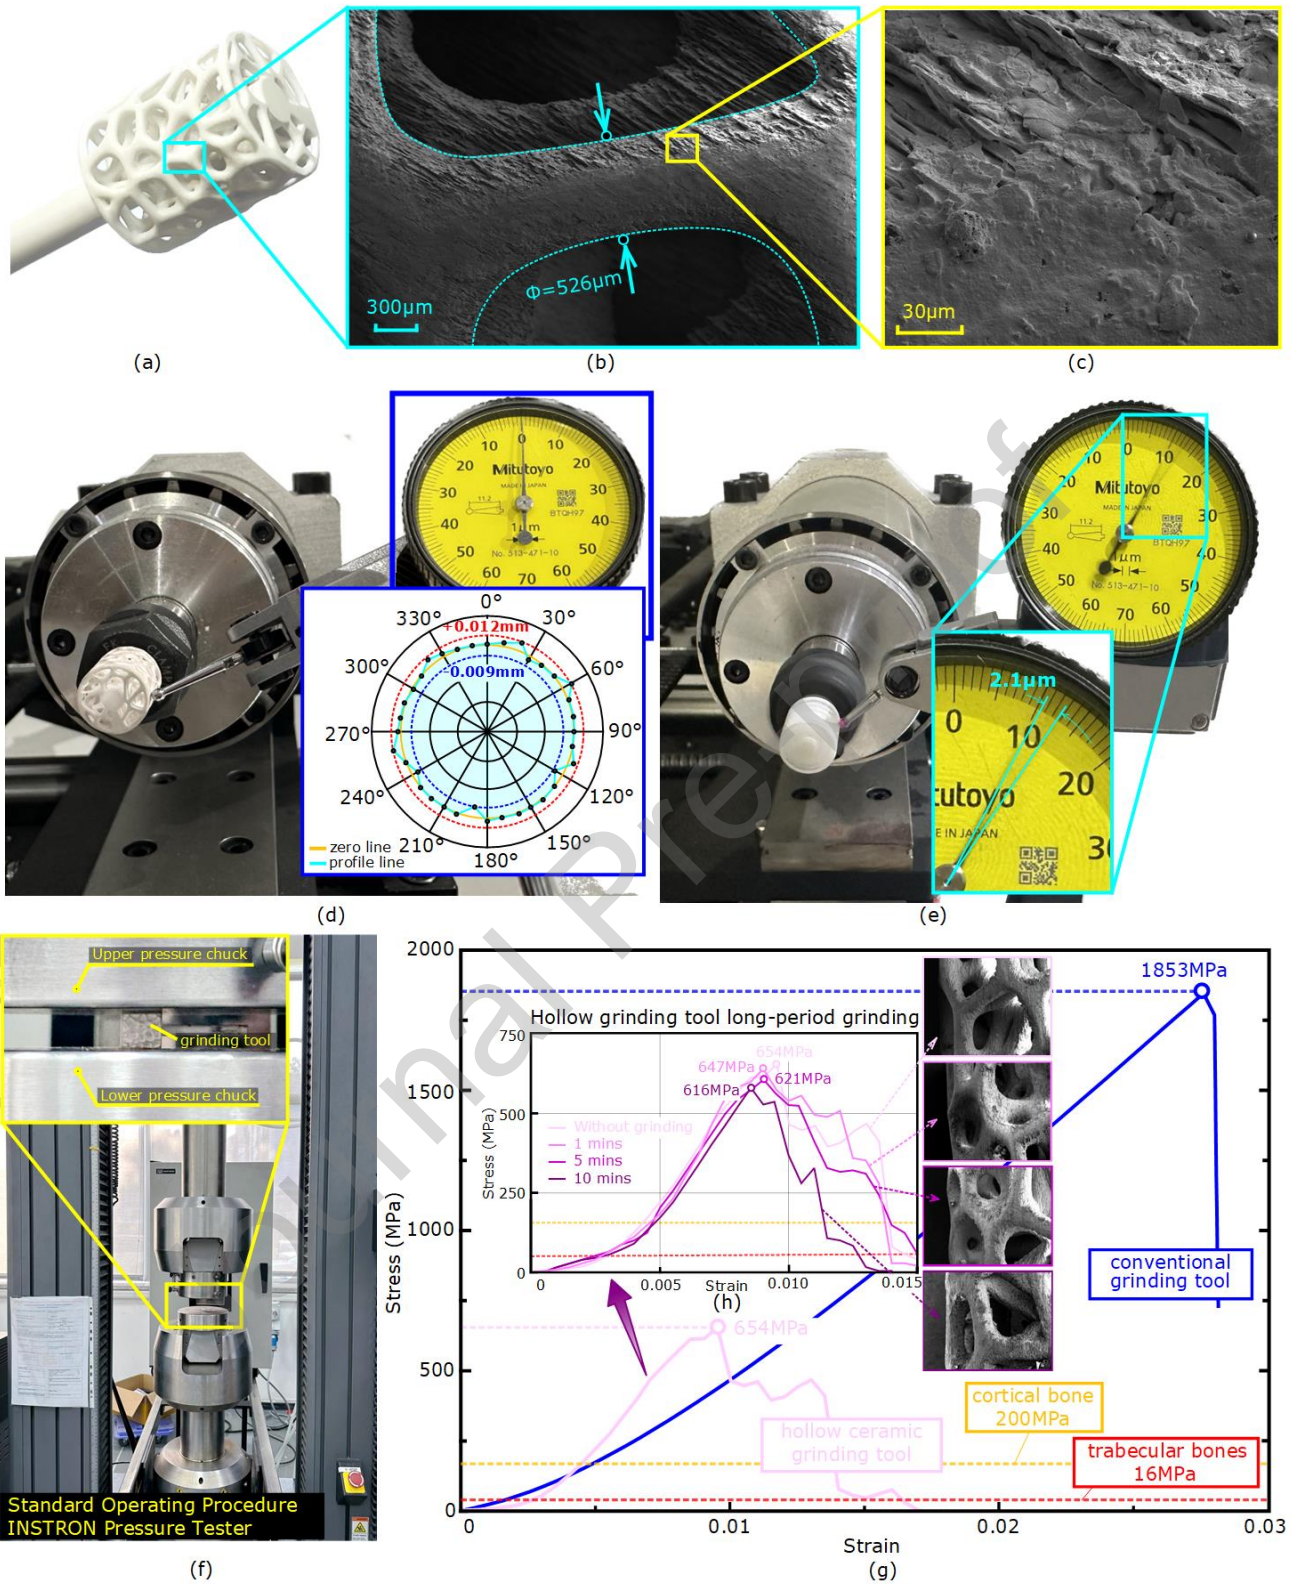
Evaluation of the printed hollow grinding tools: (a) sample picture and (b-c) SEM morphological images of 3D printed hollow grinding tools; (d) roundness test device and (e) dynamic balancing results; (f) tensile test and (g) obtained stress-strain curve between hollow and conventional grinding tool and (h) stress-strain curve after long-period grinding.
